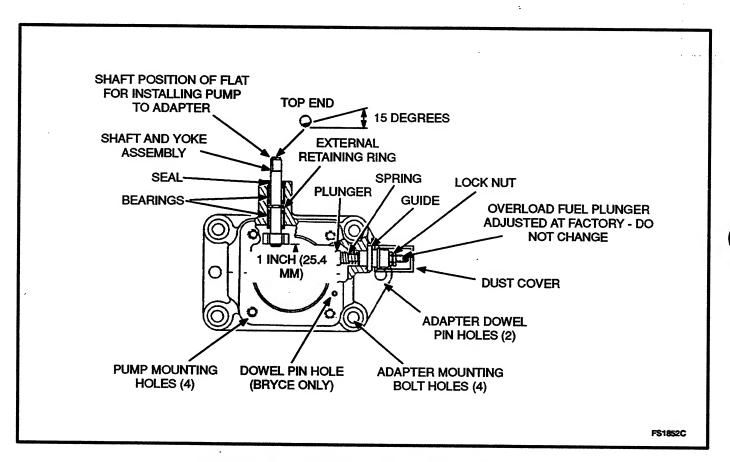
INJECTION PUMP ADAPTER ASSEMBLY
